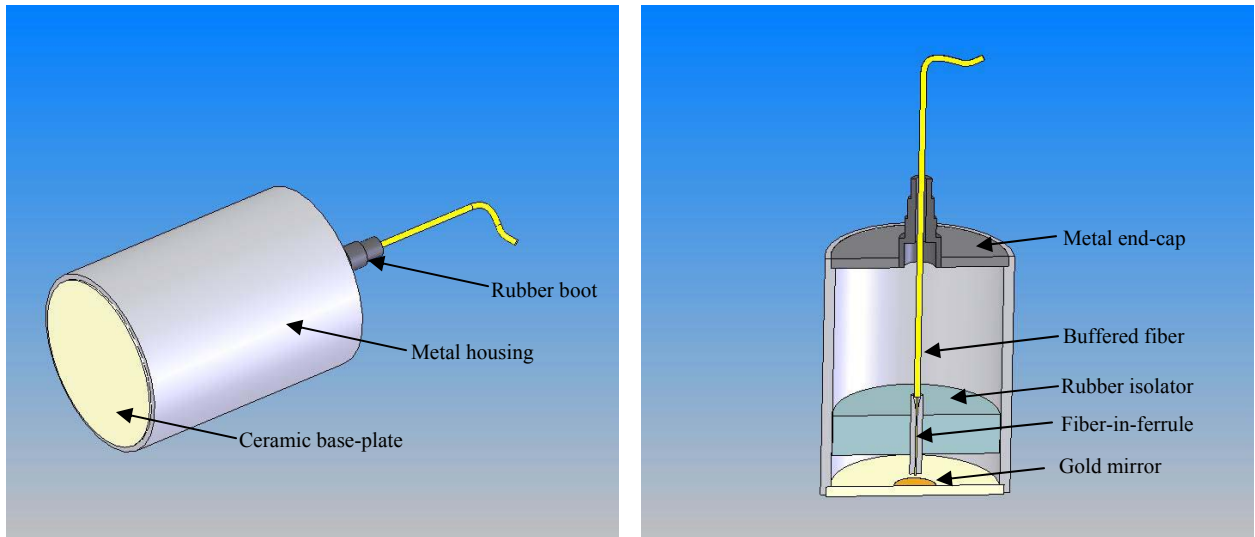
Optical acoustic emission sensor packaged in a PAC standard housing.
